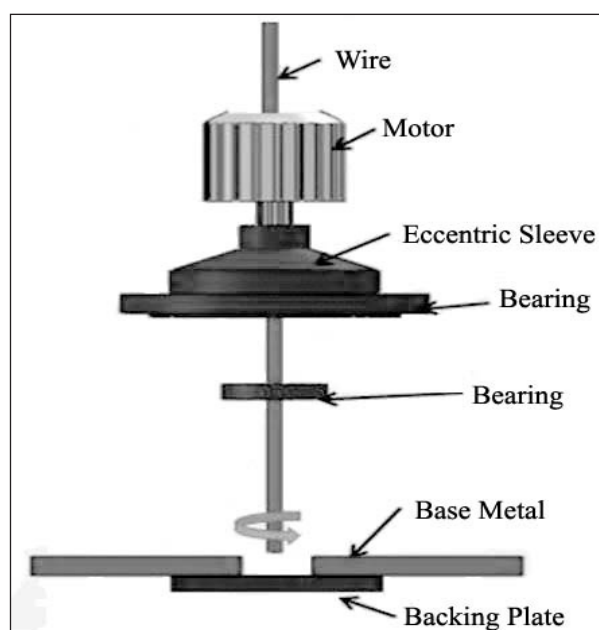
Schematic diagram of Rotary arc welding set up.
